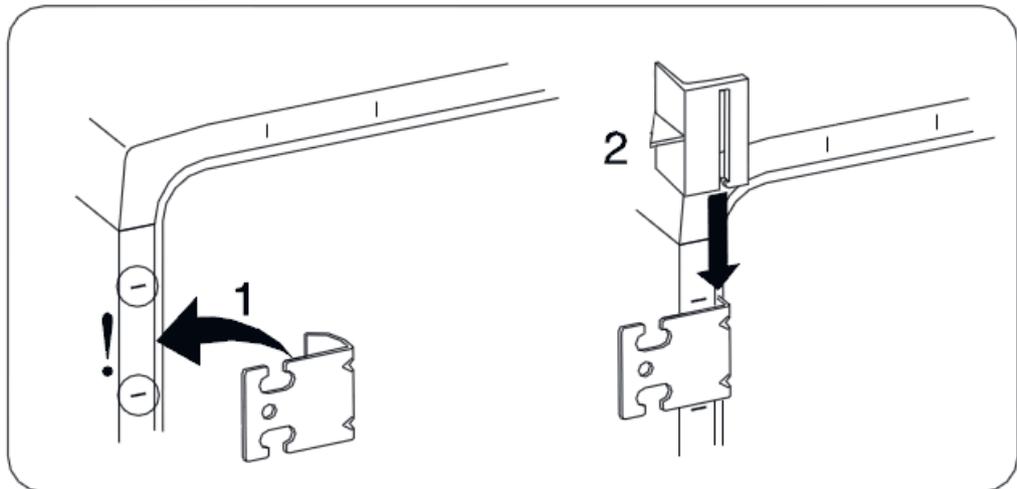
Hook the mounting lug in position and attach the securing bracket - example of side mounting
